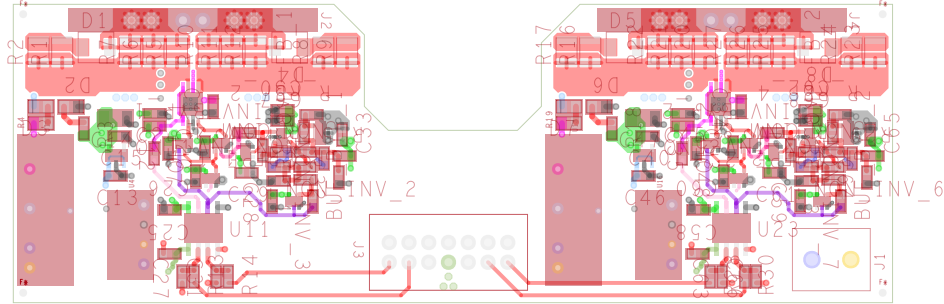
PCB design of the prototype Synchronous RB Switch gate driver, showing the top copper layer (layer 1 of 4).
